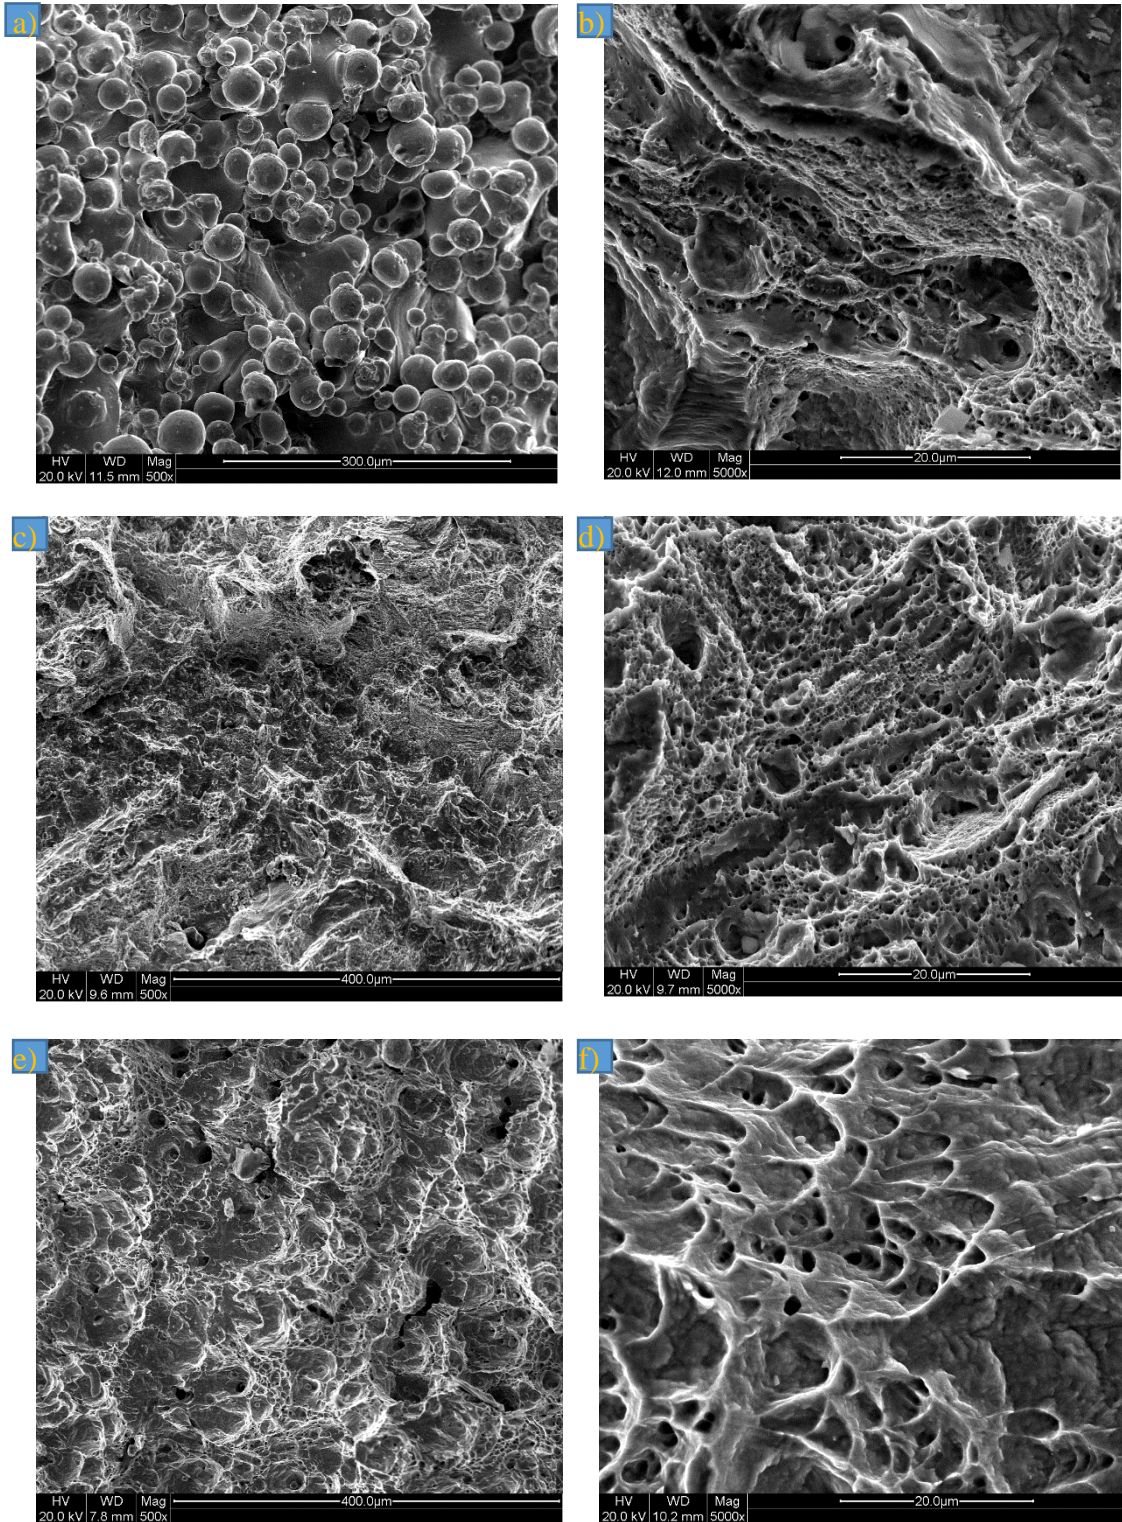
SEM images of the Impact fracture surface for: a&b as built 3d printed samples, c & d heat treated 3D printed samples, e&f CNC machined samples
